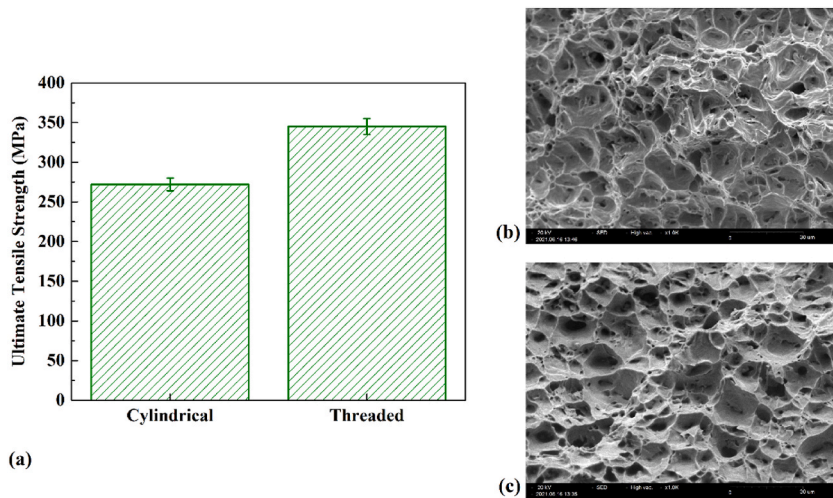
(a) Ultimate tensile strength of FSW samples. ESM image of tensile test fractured sample that FSW with (b) threaded and (c) cylindrical pin.
